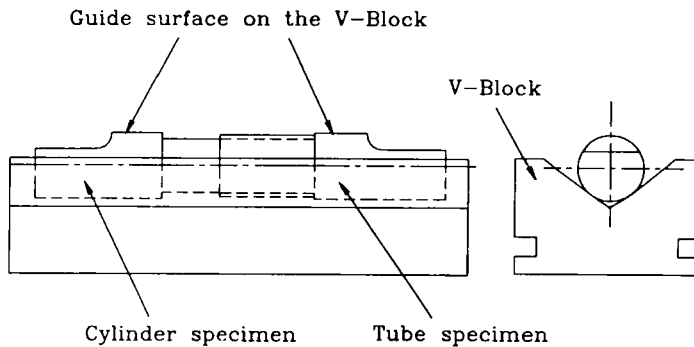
V-block used for concentric bonding of the adhesively-bonded lap joint.
